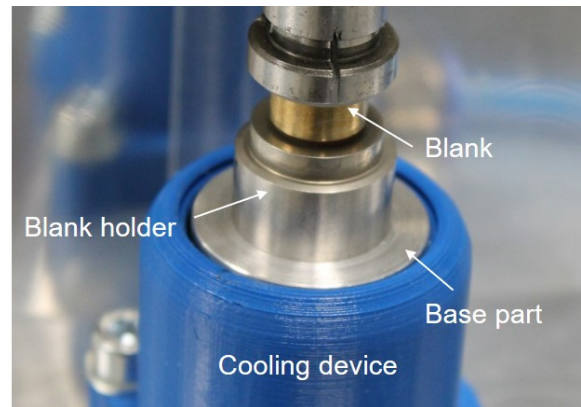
Blocking station for joining IOL blanks to the blank holder.
